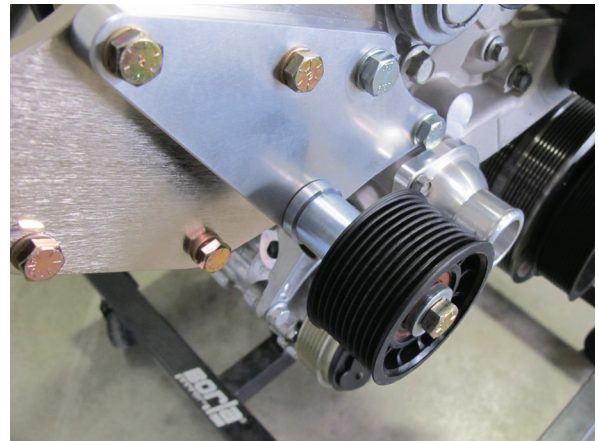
e: Install 10-Rib Grooved Idler Pulley
